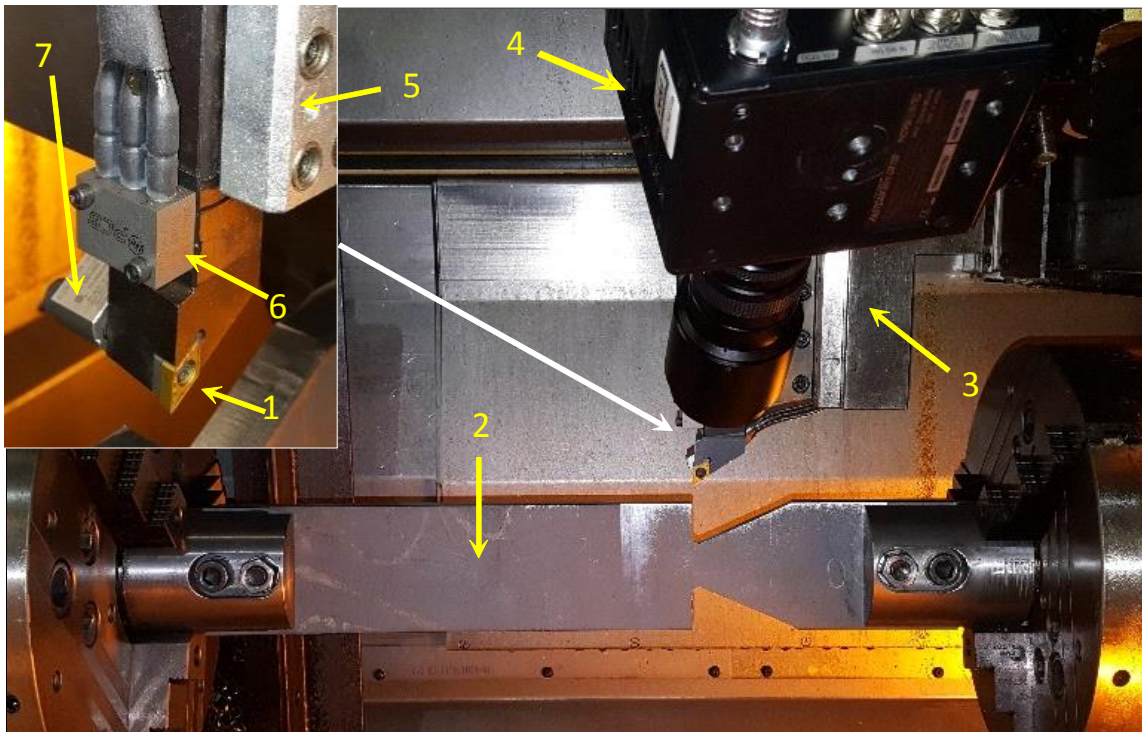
Experimental setup for intermittent turning (1) cutting insert, (2) workpiece, (3) turret, (4) HSC, (5) dynamometer, (6) accelerometer and (7) AE sensor
